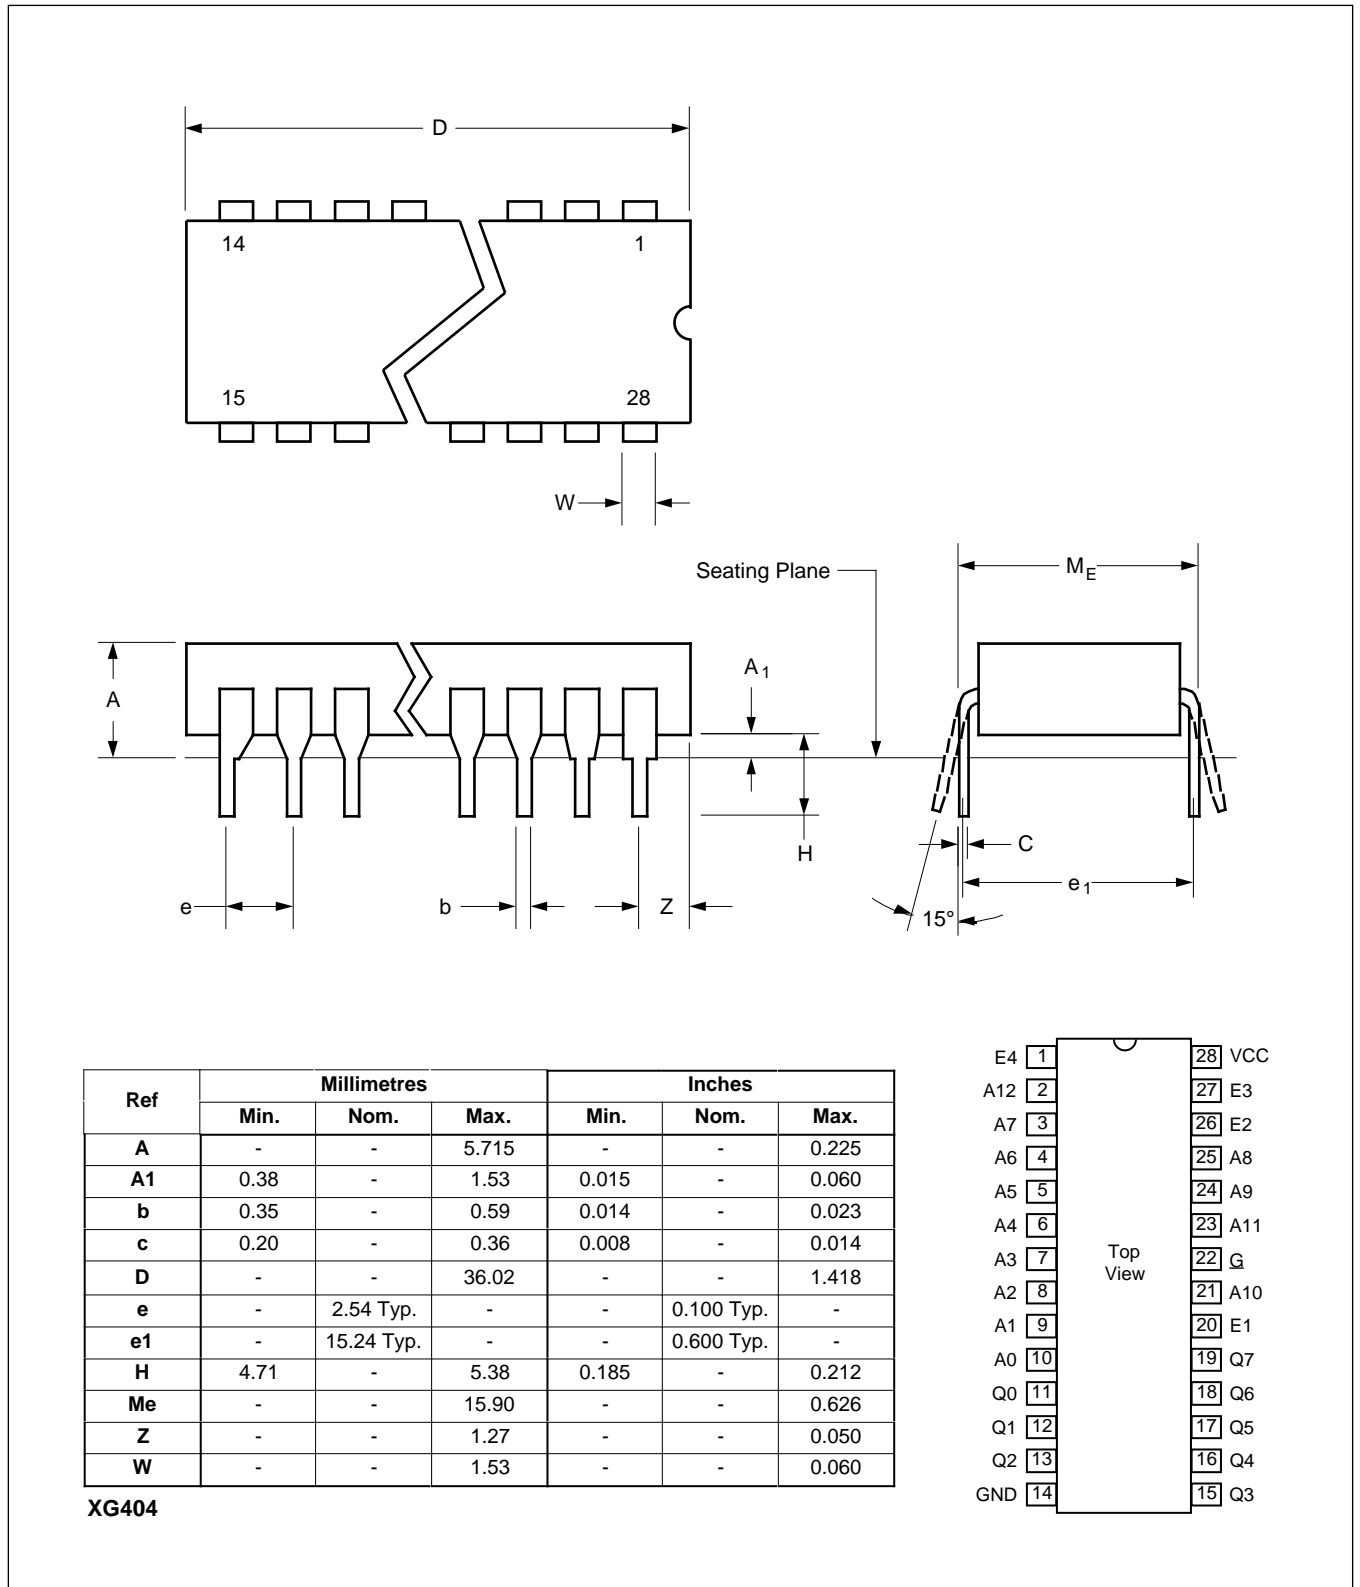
28-Lead Ceramic DIL (Solder Seal) - Package Style C
